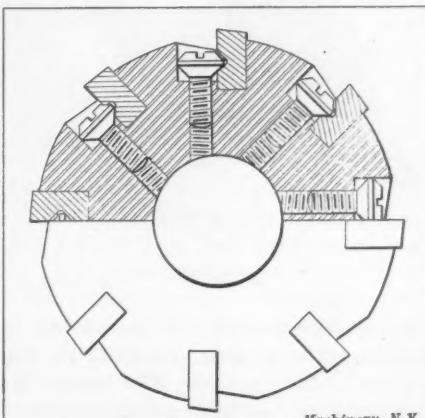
Sectional View of Adjustable Reamer showing Method of Binding Blades
